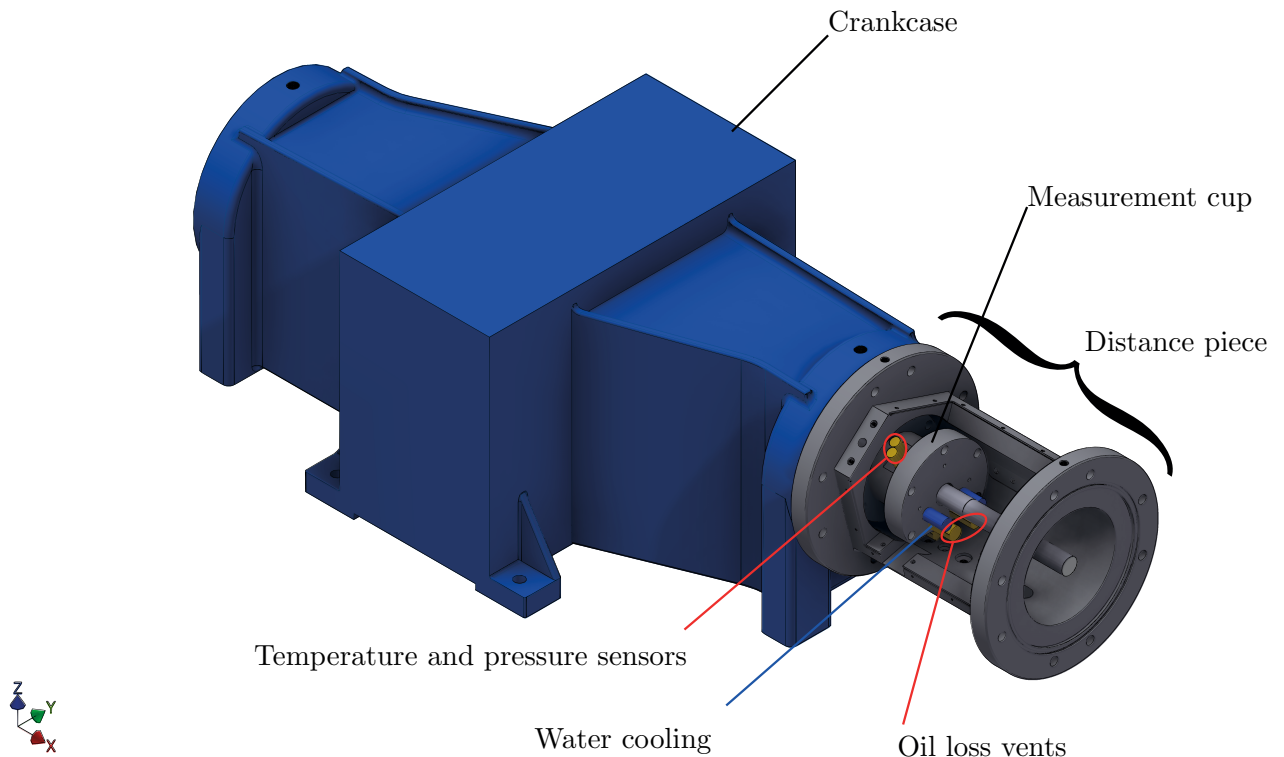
Measurement set-up attached to the crankcase of the test compressor
